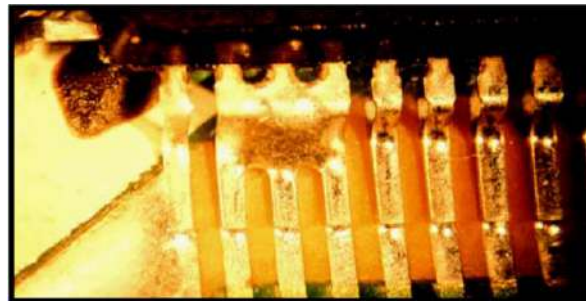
Bridging image[50] where solder meant to be separated joined together with the risk of forming short circuits.
